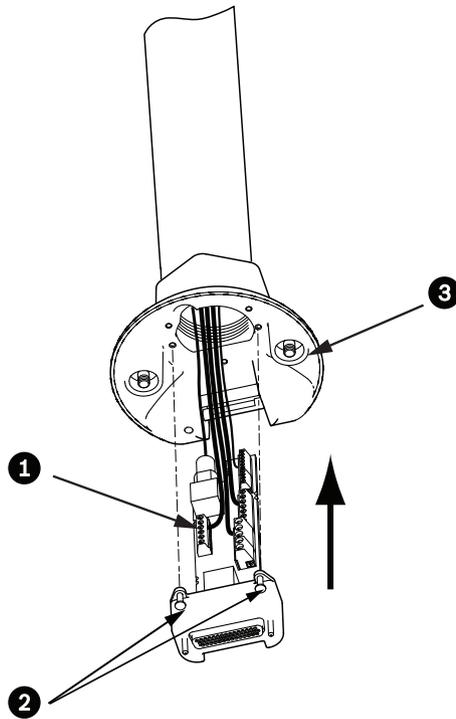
Pipe Interface Board to Dome Cap Assembly
